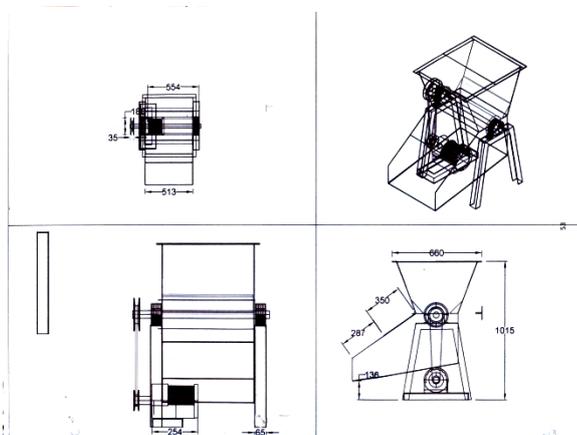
The Technical view of Akpu (Cassava) Milling Machine
